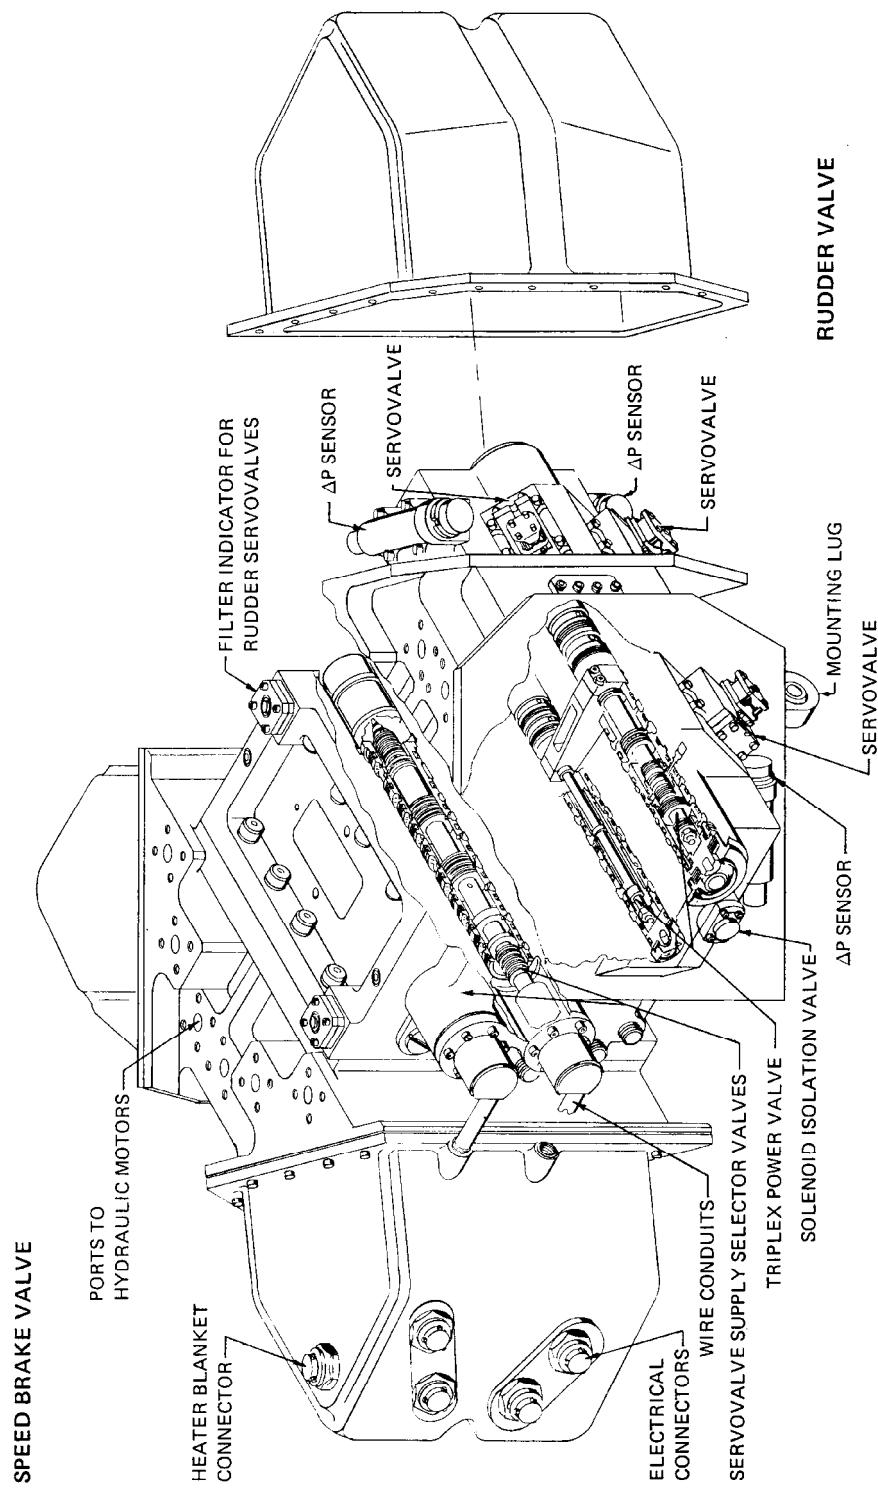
RUDDER/SPEED BRAKE VALVE MODULE
